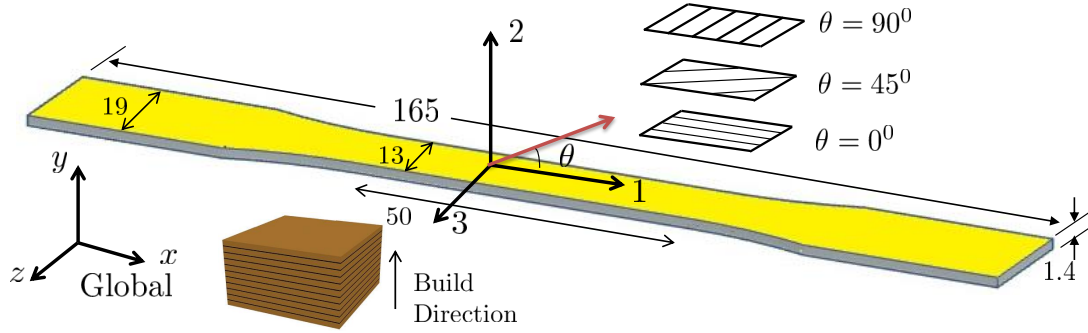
ASTM D638 dogbone shaped test specimen with Details.
